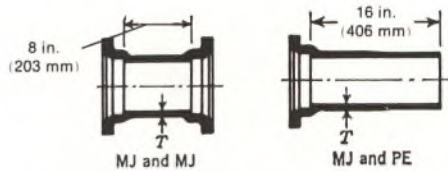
Mechanical-Joint Connecting Pieces (See Table 10.12)
